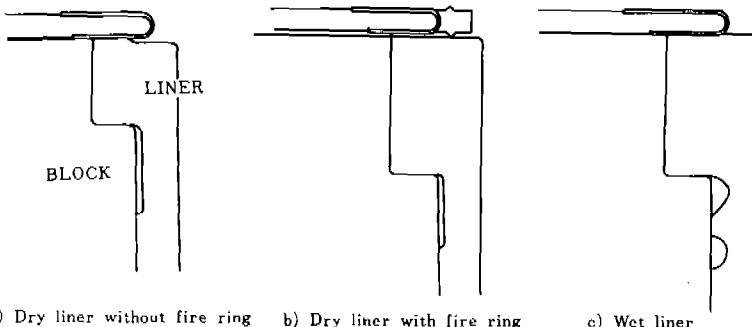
Assembly conditions of cylinder block, liner and gasket
